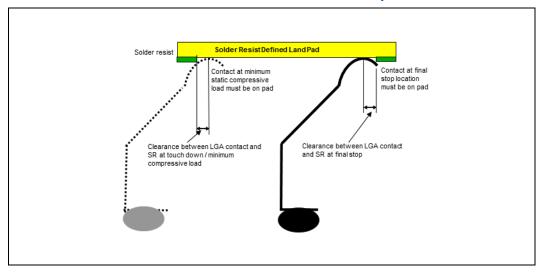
Clearance Between Solder Resist and Socket Contact Tip
